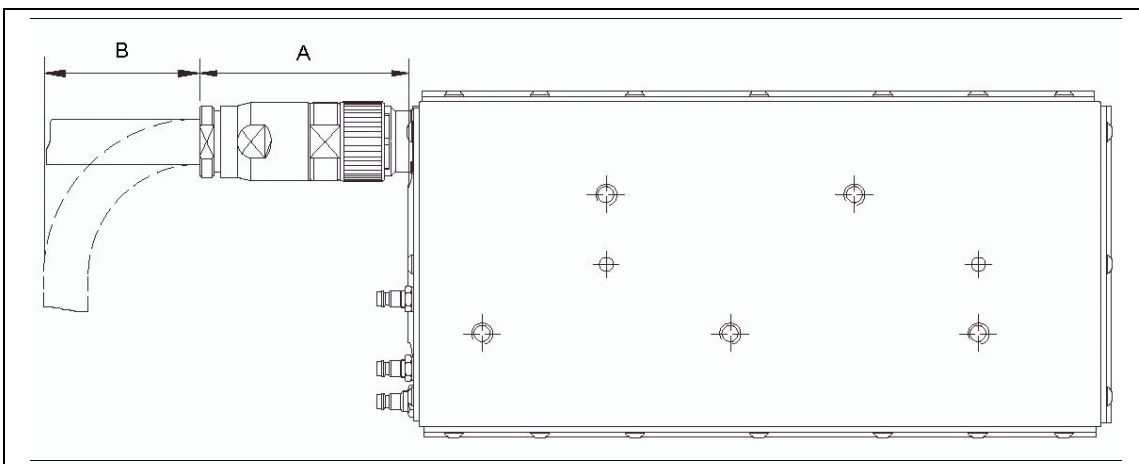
Mounting space for the connection system of the 1FN1xxx-xAxxx motors (with plug, top view)
